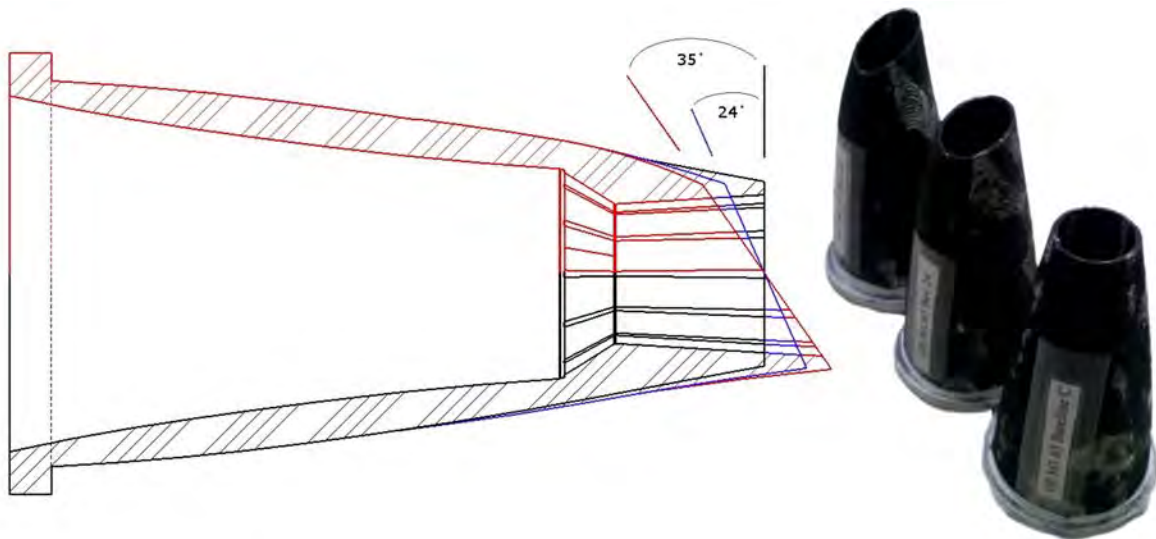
The Beveled Nozzles – Left: 2-D Cross-Sectional Drawing; Right: Image of Rapid Prototyped Nozzles.
